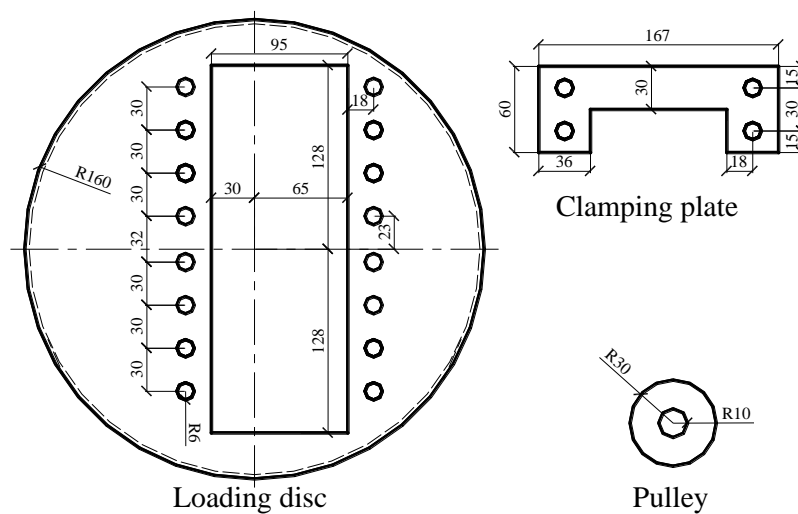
Detail dimensions in millimetres of three main parts of loading fixture: Loading disc, clamping plate and pulley
